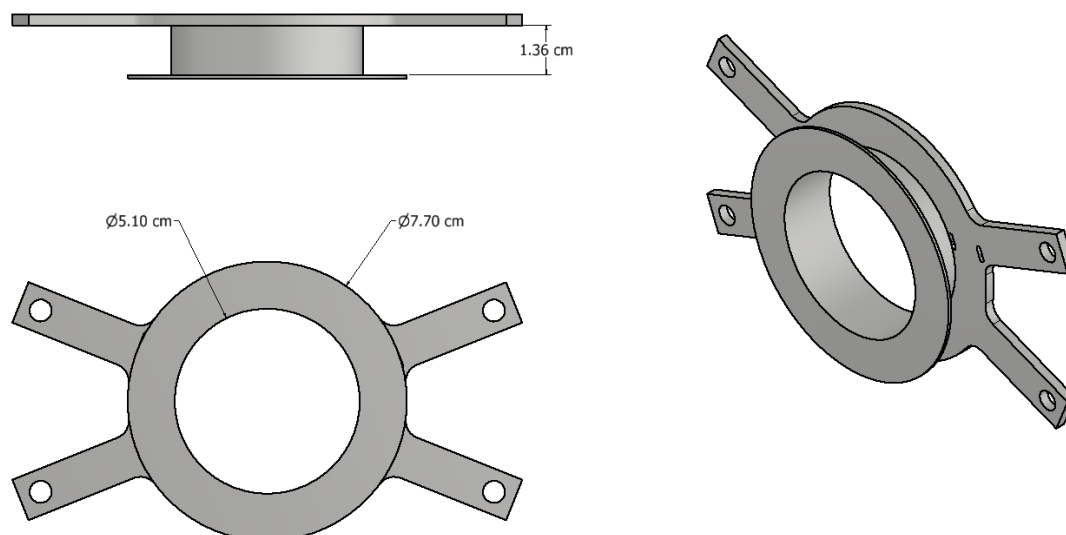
CAD drawing of an aluminum MOT coil winding structure.
